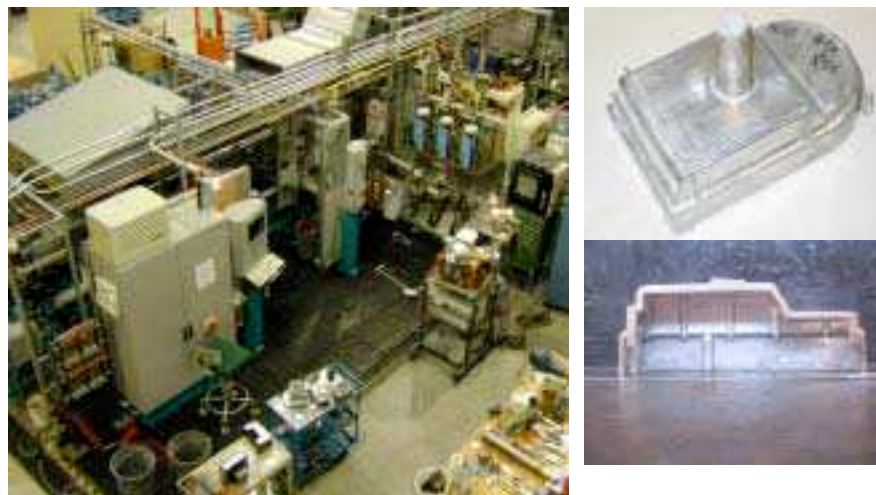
Die Casting Laboratory; top view and mid-sectional view of the box casting through the runner are shown.
